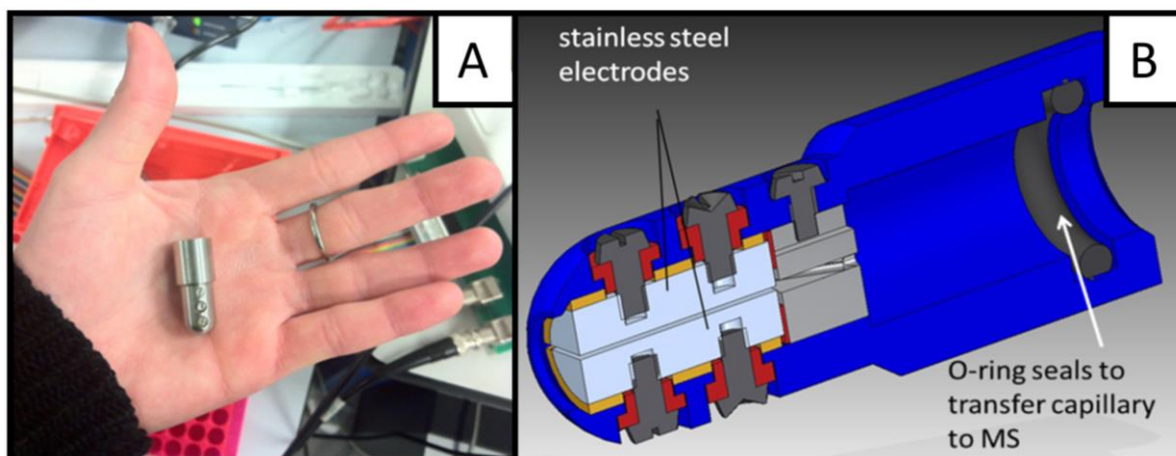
A. Picture and B. AutoCAD drawing of the DIMS assembly used for the experiments described herein.
